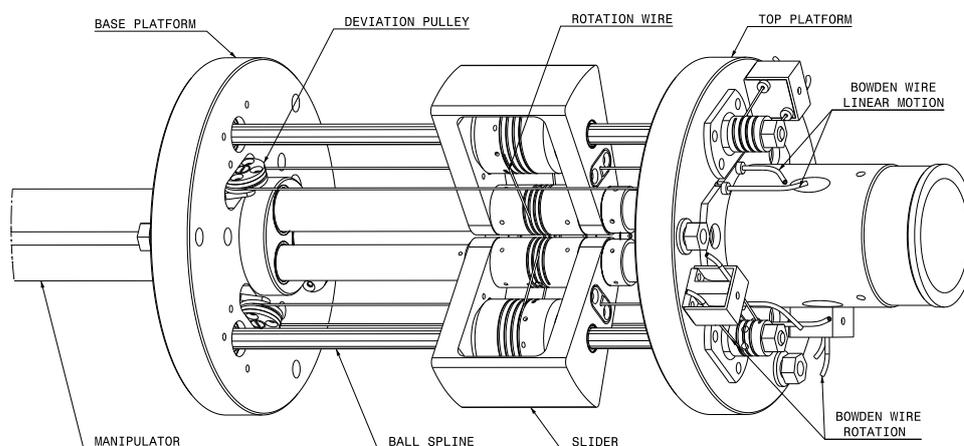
Concept of the linear and rotary joint actuation by using bowden wire mechanism.
